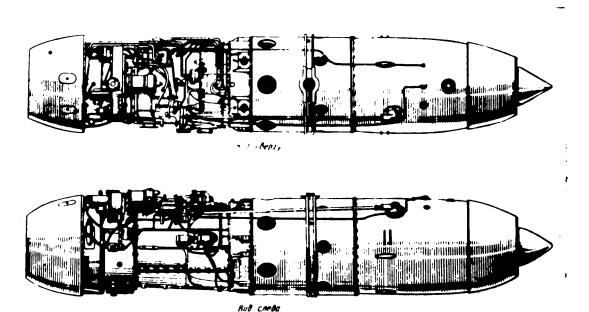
Overall View of an Engine With Axial-Flow Compressor
